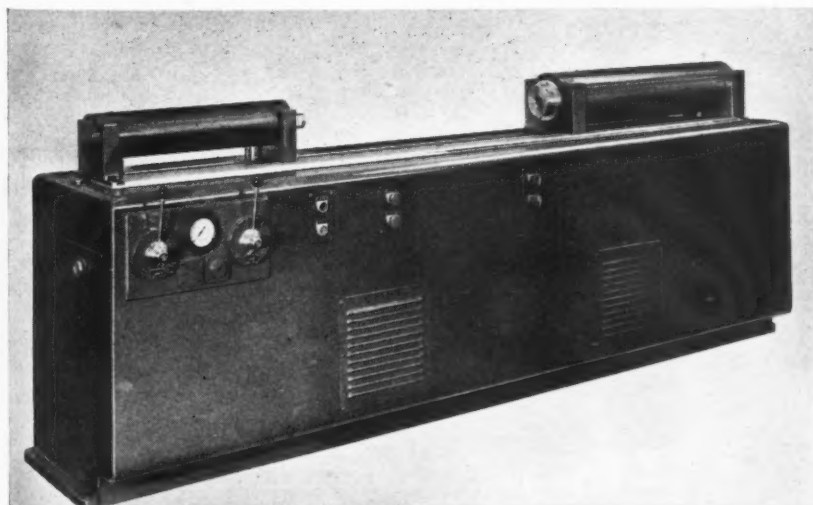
Barnes Hydraulically Operated Drawing Machine
